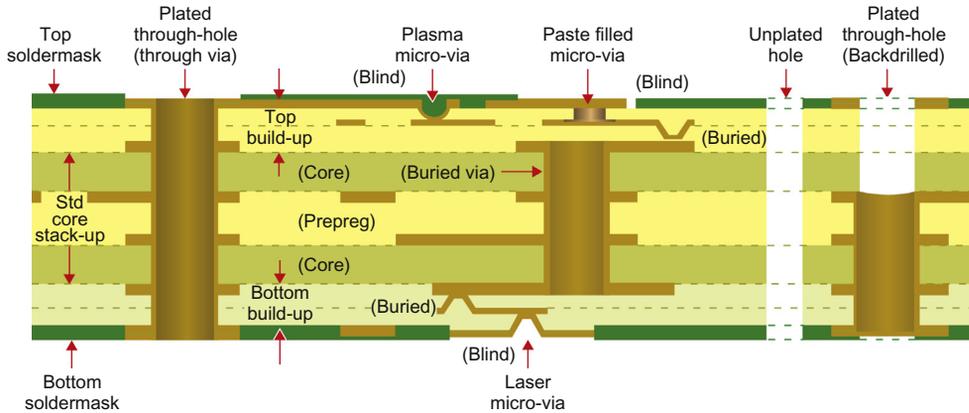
A built-up, multitechnology, PCB stack-up. *PCB*, Printed circuit board.
